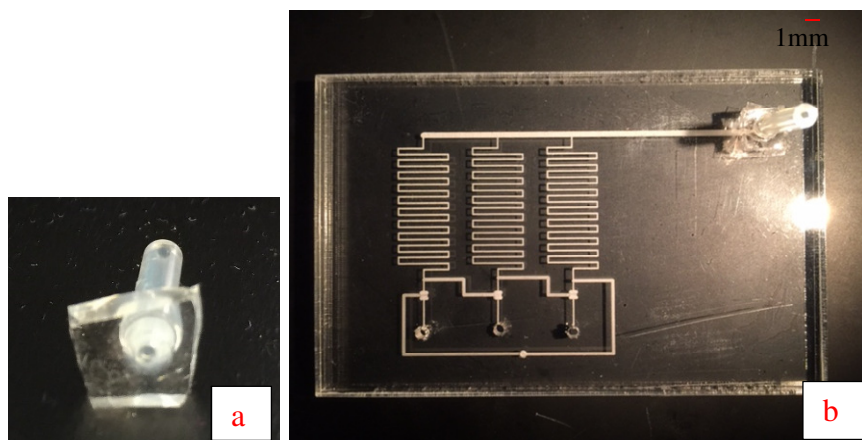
Inlet tubes(a) and (b) Ring oscillator cut on 1/8" thick PMMA with a laser setting of Speed 40, Power 18 for channel depths of 60um
